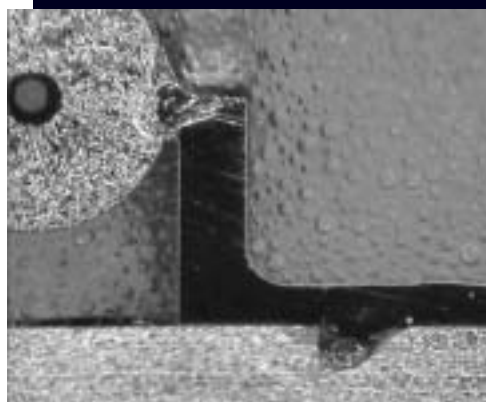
The cross section of a deformable weld clip shows the base and ferrule welds. Analysis of the weld by cross-sectioning is essential in weld-schedule process development and quality assurance.
